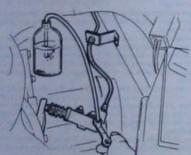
Bleeding the hydraulic clutch system (Sec 6)
